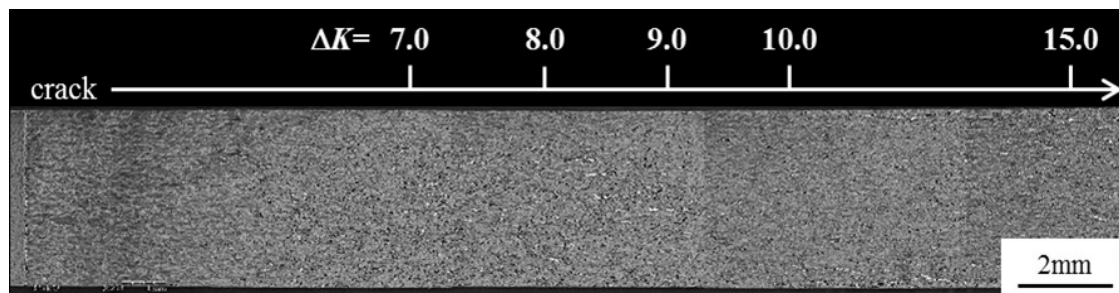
Fracture surface of A6061-T6 after FCP test.
